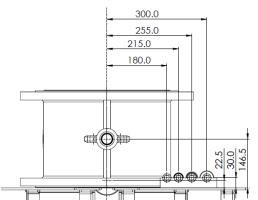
Position of the bottom hole for EVFL DN350 and the PR in the fixture, with respect to the coordinate system-1.
